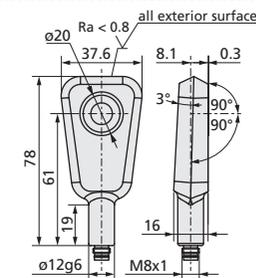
pms sensor D12 adapter shaft with sensor screw connection BF-pms/A1 mounted to machine part or to stainless steel tube D26.8 with internal thread M20x1.5
